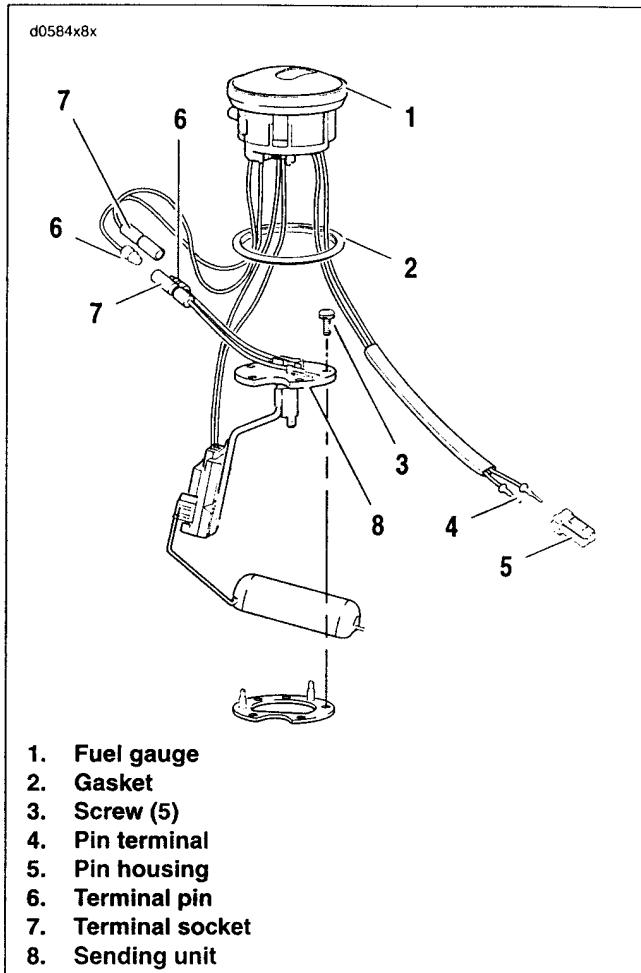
Fuel Gauge: FXDL and FXDWG
